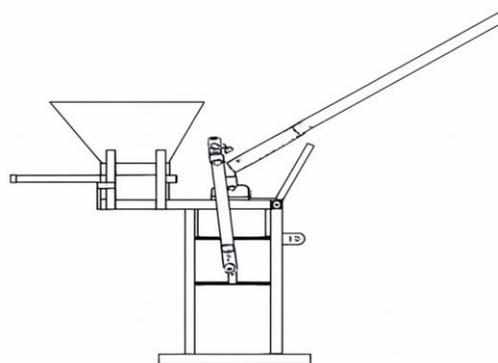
Front view illustrating frame structure, mold position, and pressing plate alignment.
